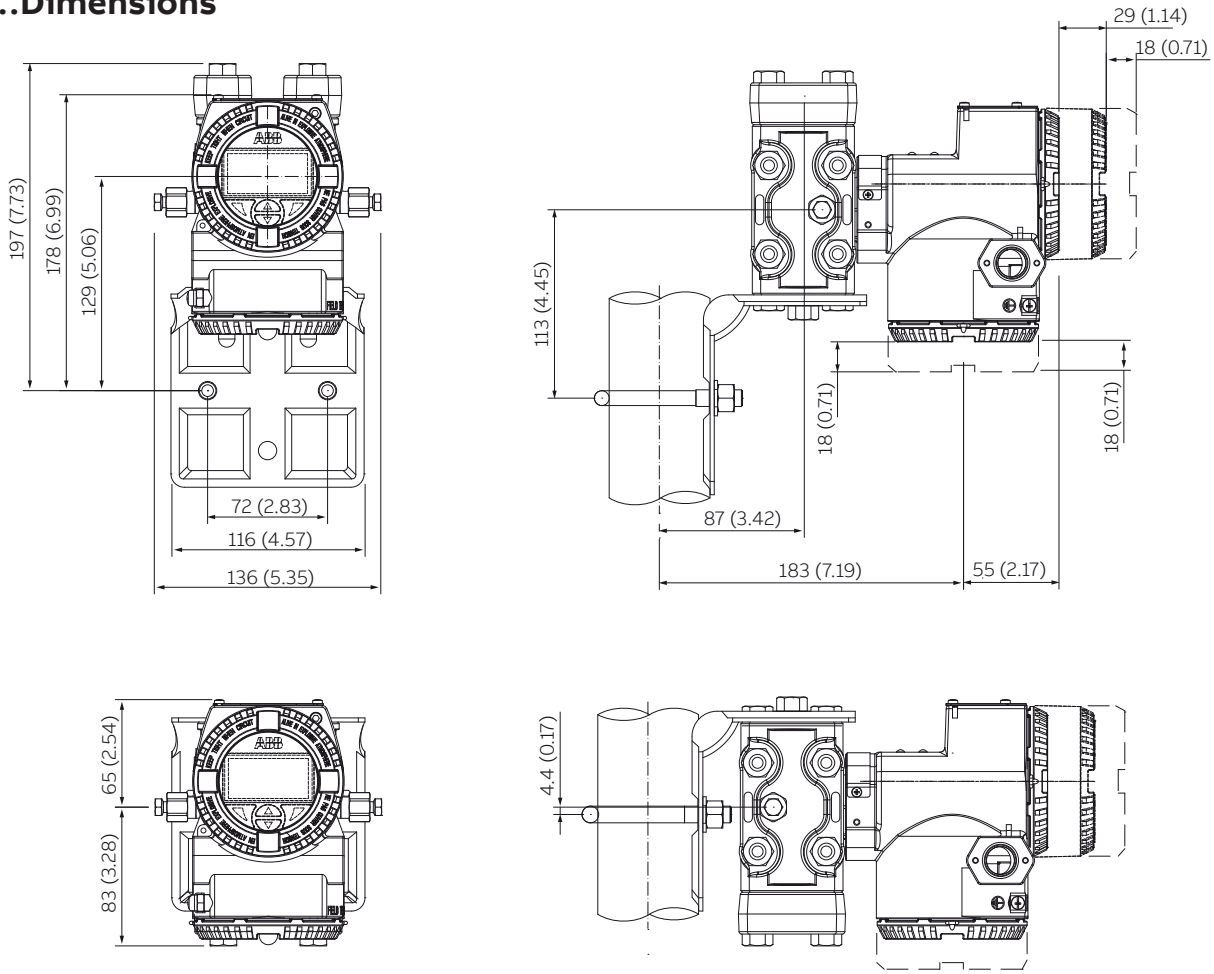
Transmitter with DIN aluminium housing - horizontal flanges on bracket for vertical or horizontal 60 mm. (2 in.) pipe mounting
